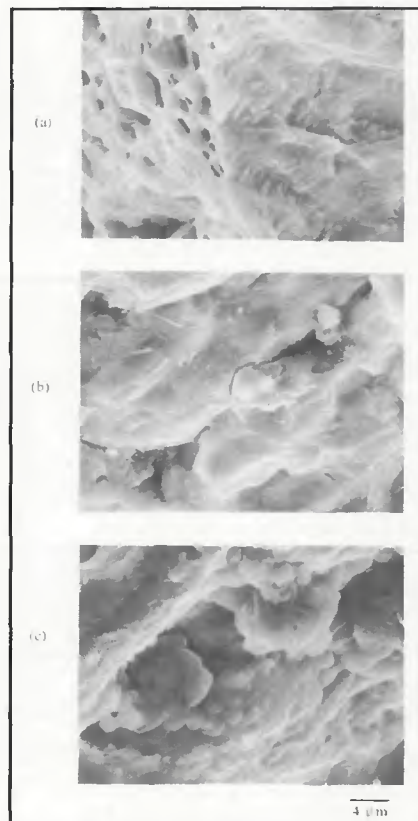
SEM fractographs of GTA weldments. A—As-welded condition; B—aged at 190°C for 16 h; C—aged at 230°C for 16 h
